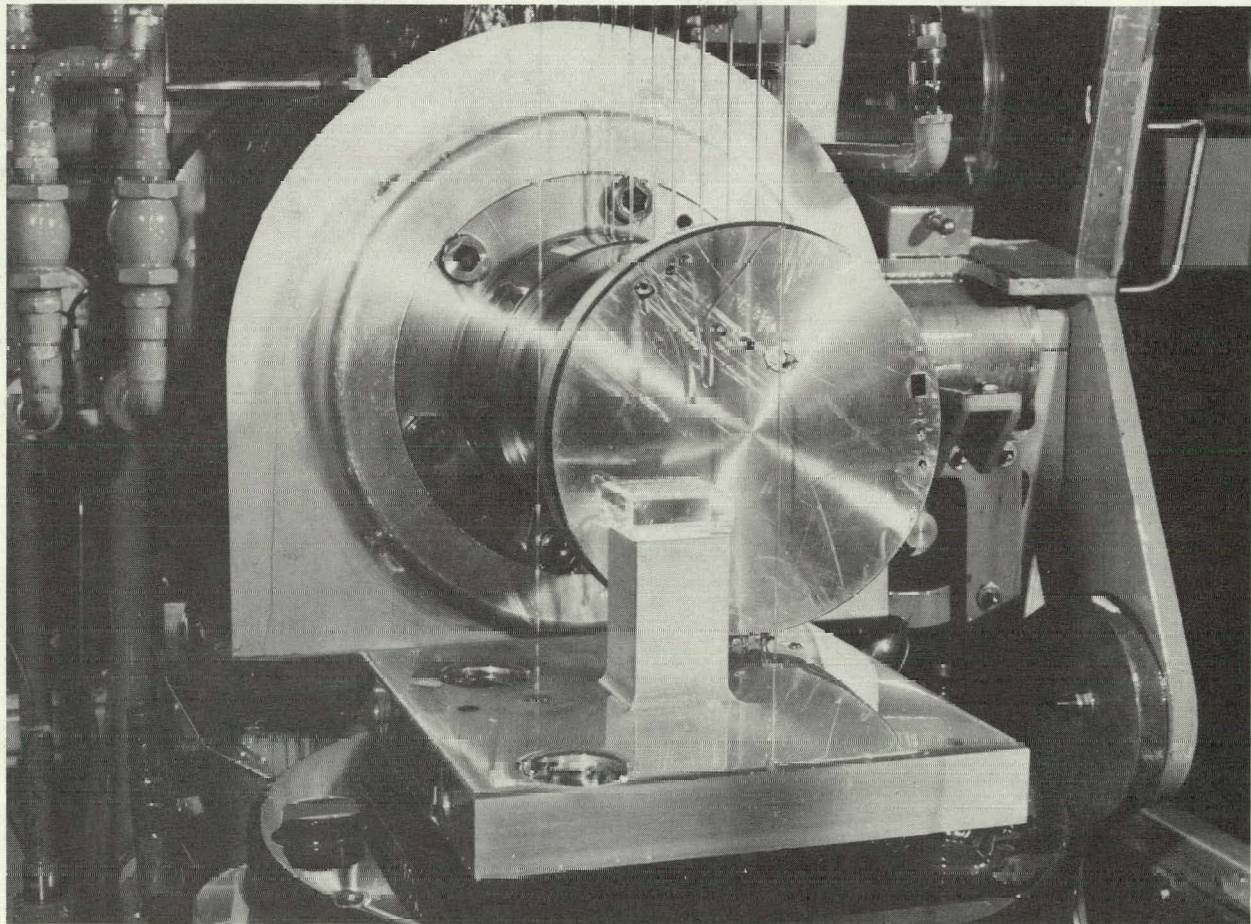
A KDP crystal being machined on the diamond turning machine (DL-1).
